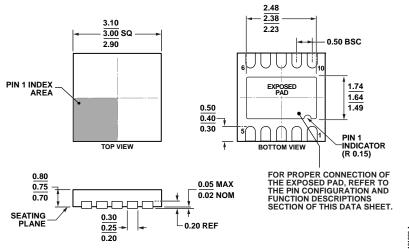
10-Lead Frame Chip Scale Package [LFCSP_WD] 3 mm × 3 mm Body, Very Thin, Dual Lead (CP-10-9) Dimensions shown in millimeters
